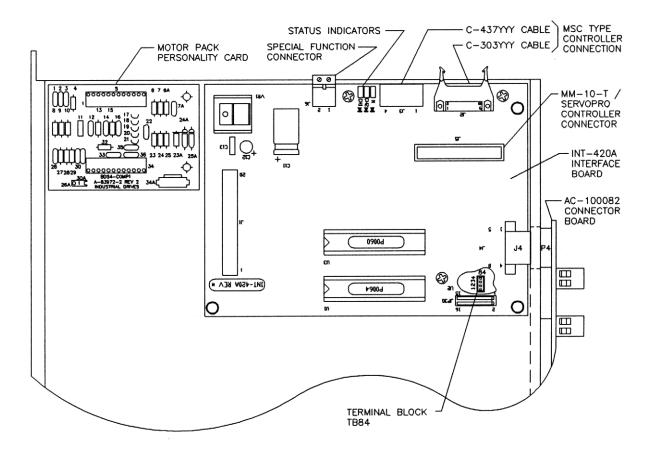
Drive: Partial Side View (Cover Removed)
